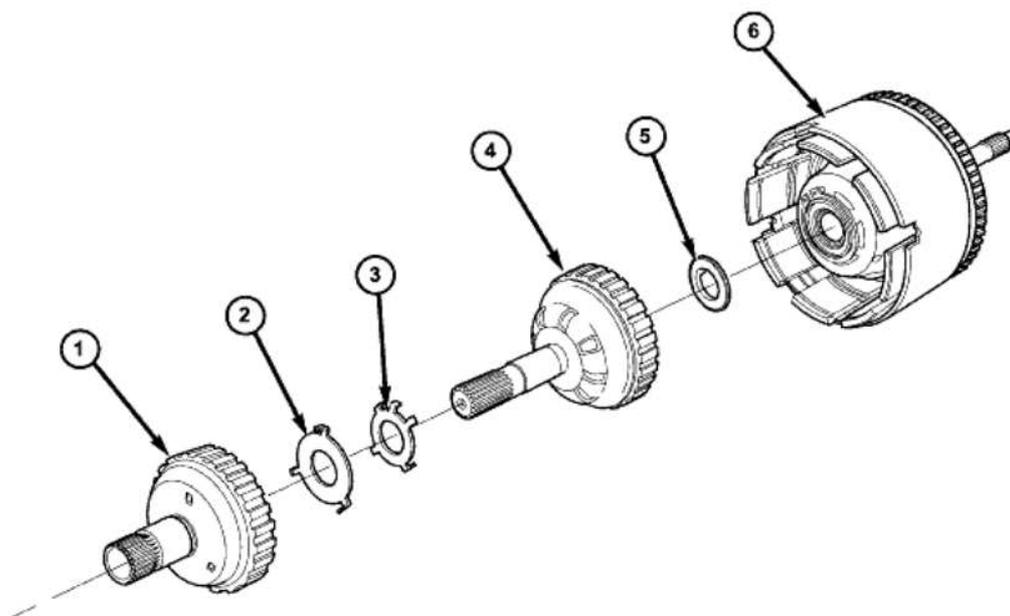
Removing/Installing OD & UD Shafts, Thrust Washer & Plate, & #2 Needle Bearing
